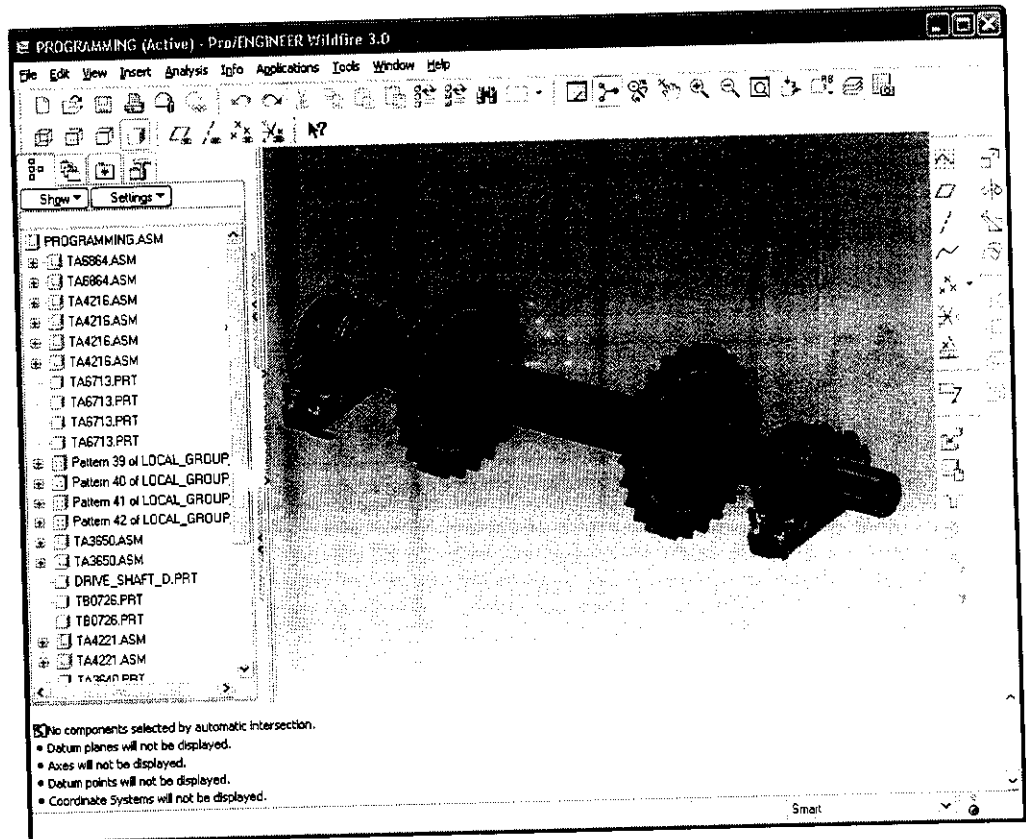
Modeled Direct type Drive Wheel Assembly
